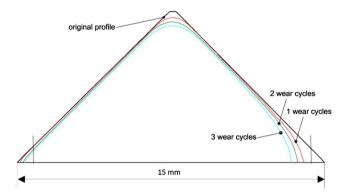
Measured shape of the tool wear pattern after each wear cycle at the tool edge. The right side is the lower part of the tool when assembled on the carrier.
